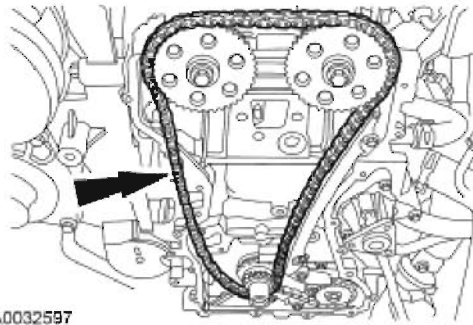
Locating Camshaft Sprocket Bolts
